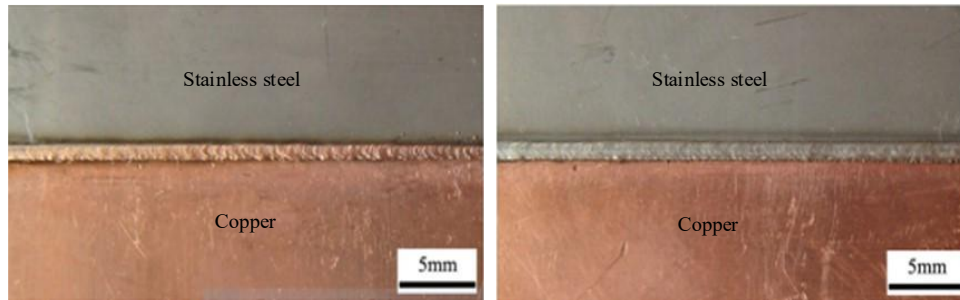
Surface appearance of the two welded interfaces: (a) laser beam offset 0mm, oblique angle 0°, (b) Laser beam offset 0.2mm, oblique angle 4° [2].
